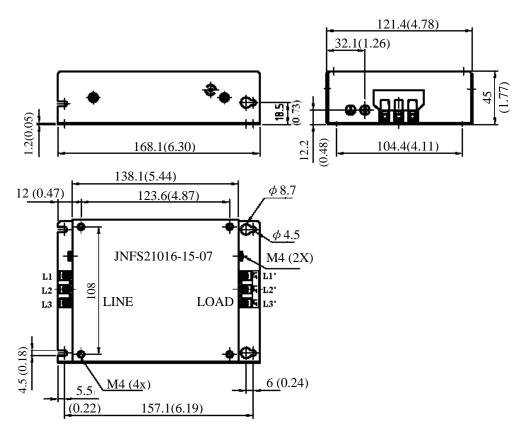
External Filter Dimensions JNFS21016-15-07
